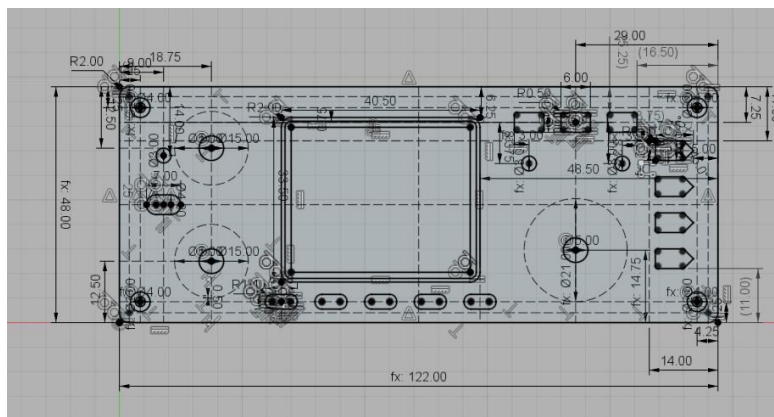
Engineering drawing of Xiegu G90 front panel.
